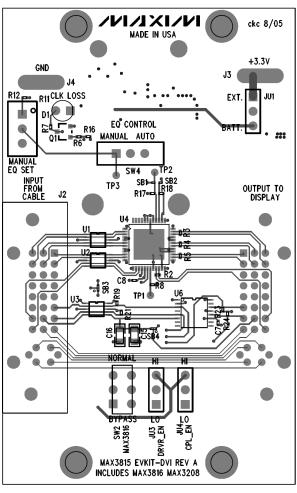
MAX3815 EV Kit PC Component Placement Guide—Component Side
